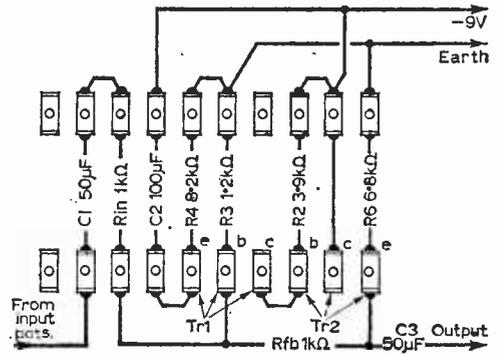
Illustrating the layout of components when built on a 10-way tag board.
